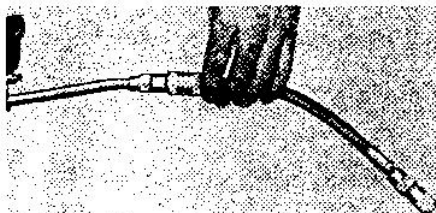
Placing the 6248 Adaptor (Extension Hose) on the 6594 Gun.
